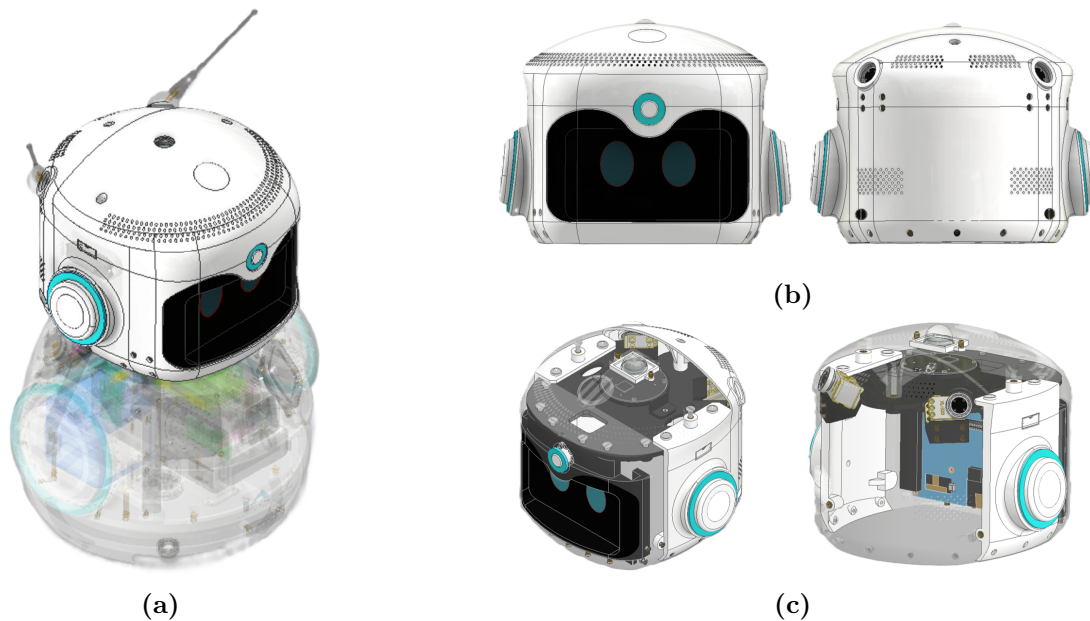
Robot head sub-assembly: (a) Location in the main assembly, (b) External front and back views, (c) Internal detail views.
